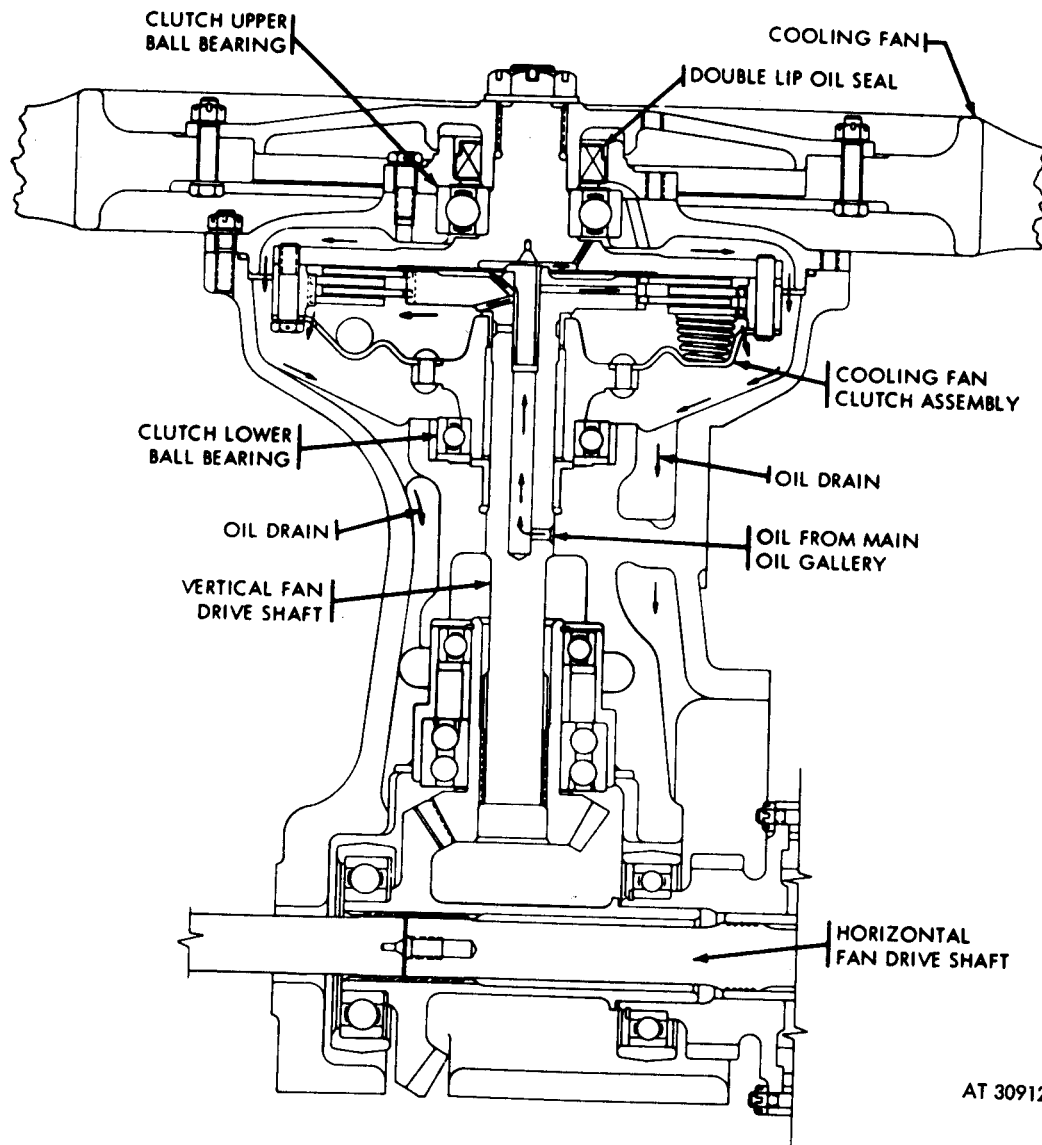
Mechanical cooling fan clutch—sectional view.
